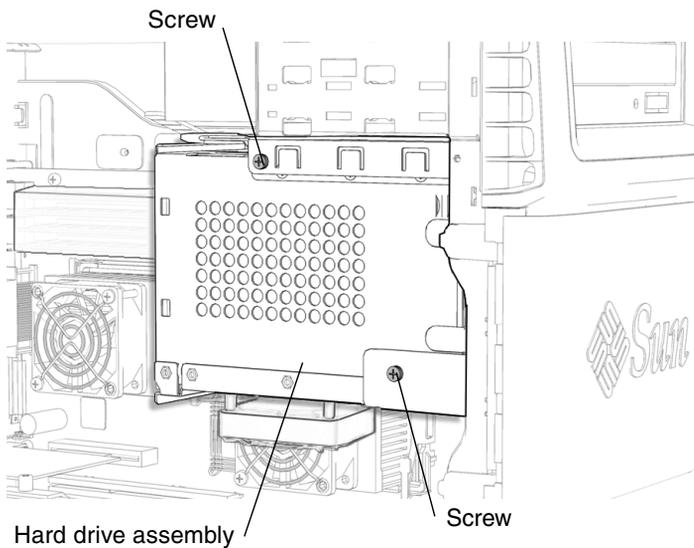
Installing the Hard Drive Assembly Screws
